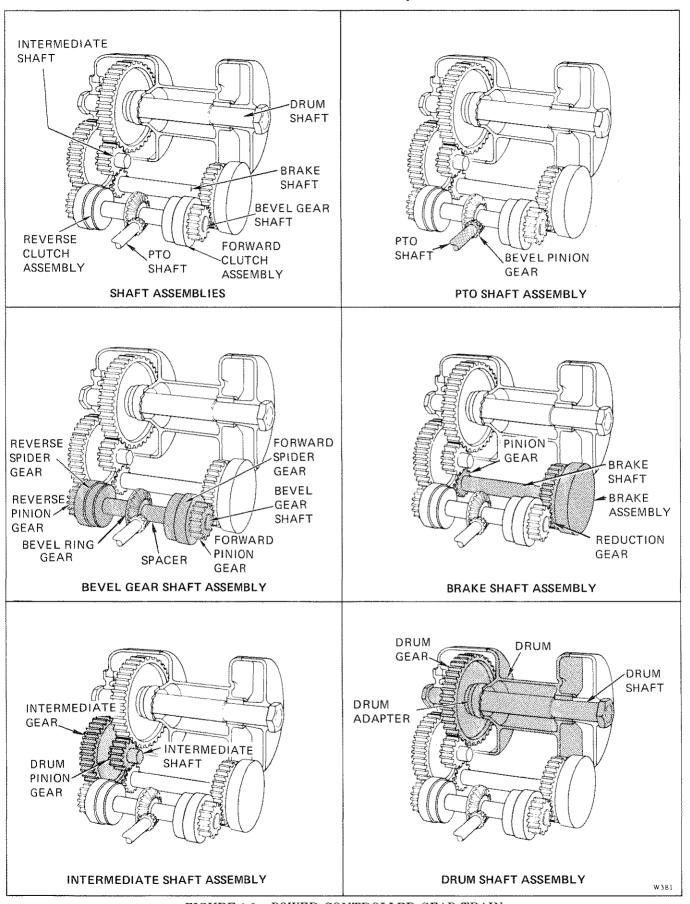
POWER CONTROLLED GEAR TRAIN
